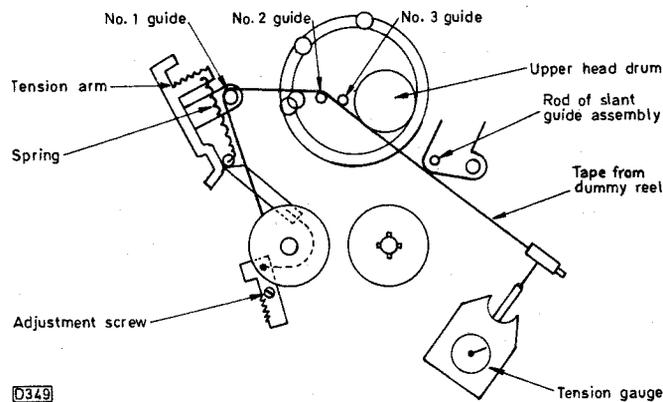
Video-8 back-tension measurement. You use a fan-type tension gauge and dummy reel.
